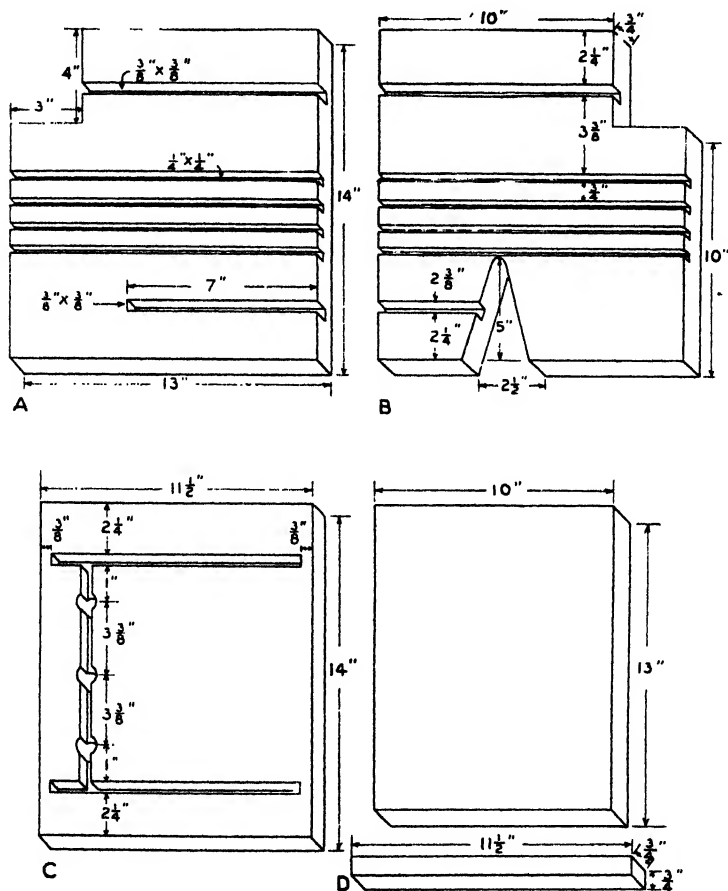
Detailed drawings showing the dimensions and construction of certain parts of the photographic light box: A, Front; B, back; C, left side; D, bottom
